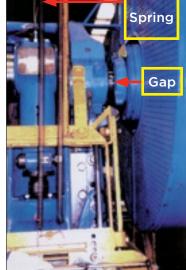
Photo A – shows the mechanical interlock bar that prevents the clutch plate from engaging, which in turn prevents the machine operating.
